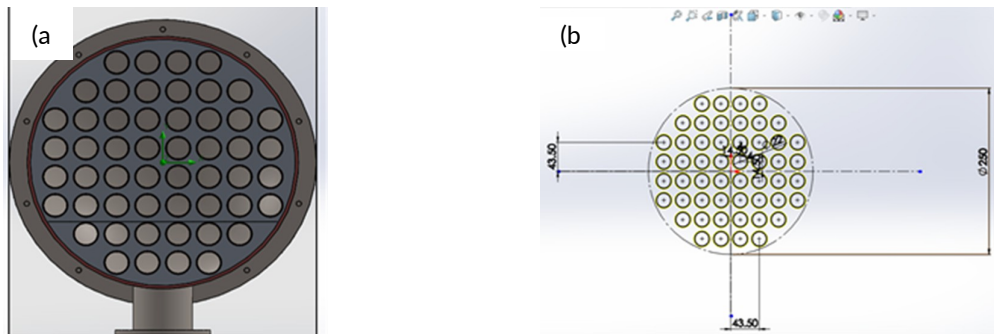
(a): Cross-sectional view of the heat exchanger, (b) cavity model of the shell & tube (HE).
